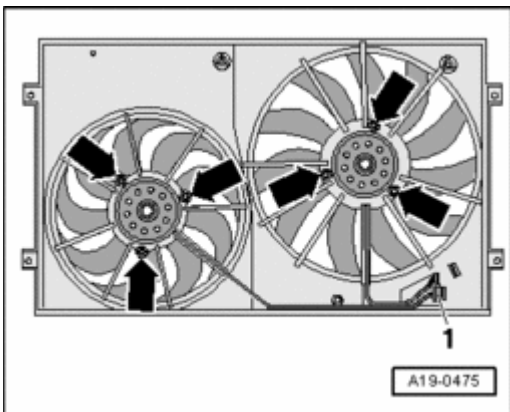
Identifying Coolant Fan Electrical Harness Connector & Nuts
